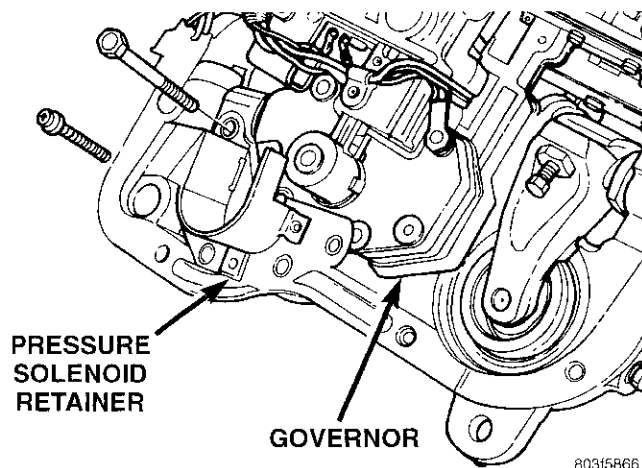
Governor Body And Retainer Plate Attaching Screw
